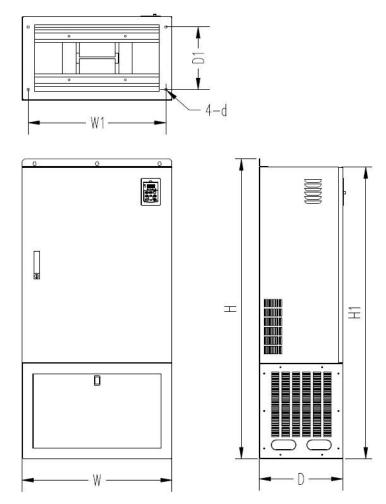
Appearance and installation dimension of KOC680 series [old product] (Cabinet structure)
